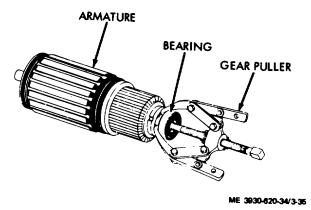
Bearing removal. (9) If necessary, remove key and snap ring securing fan to armature shaft. (10) Remove end cover and rocker arm assembly. (fig. 3-36.) Disassemble rocker arm assembly as far as necessary to remove worn or dam aged parts.
